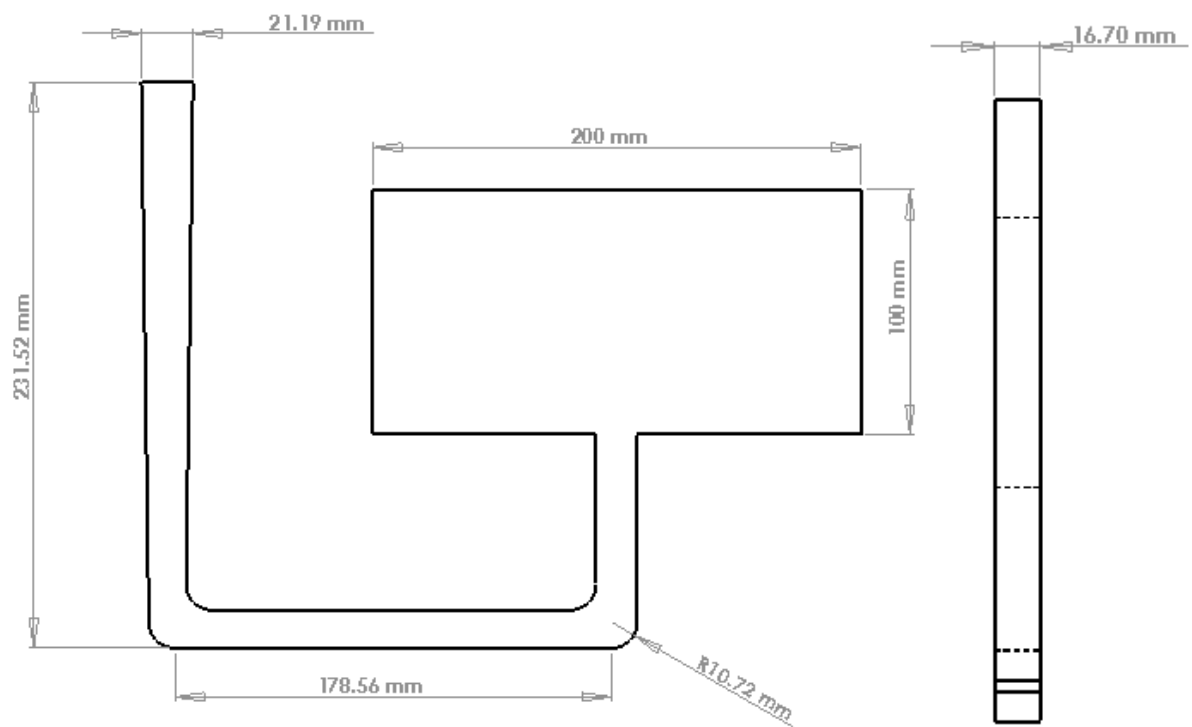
A schematic diagram showing the sand cast plate and its dimensions.
